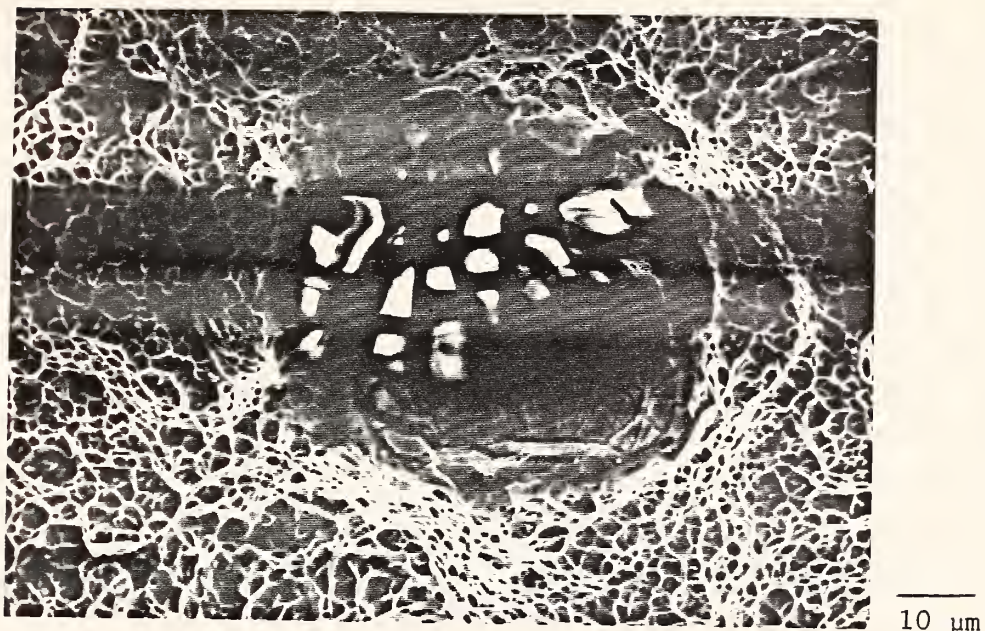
Fractograph (SEM) of a Charpy V-notch specimen from weld 6 showing one of the large inclusions on the fracture surface.
